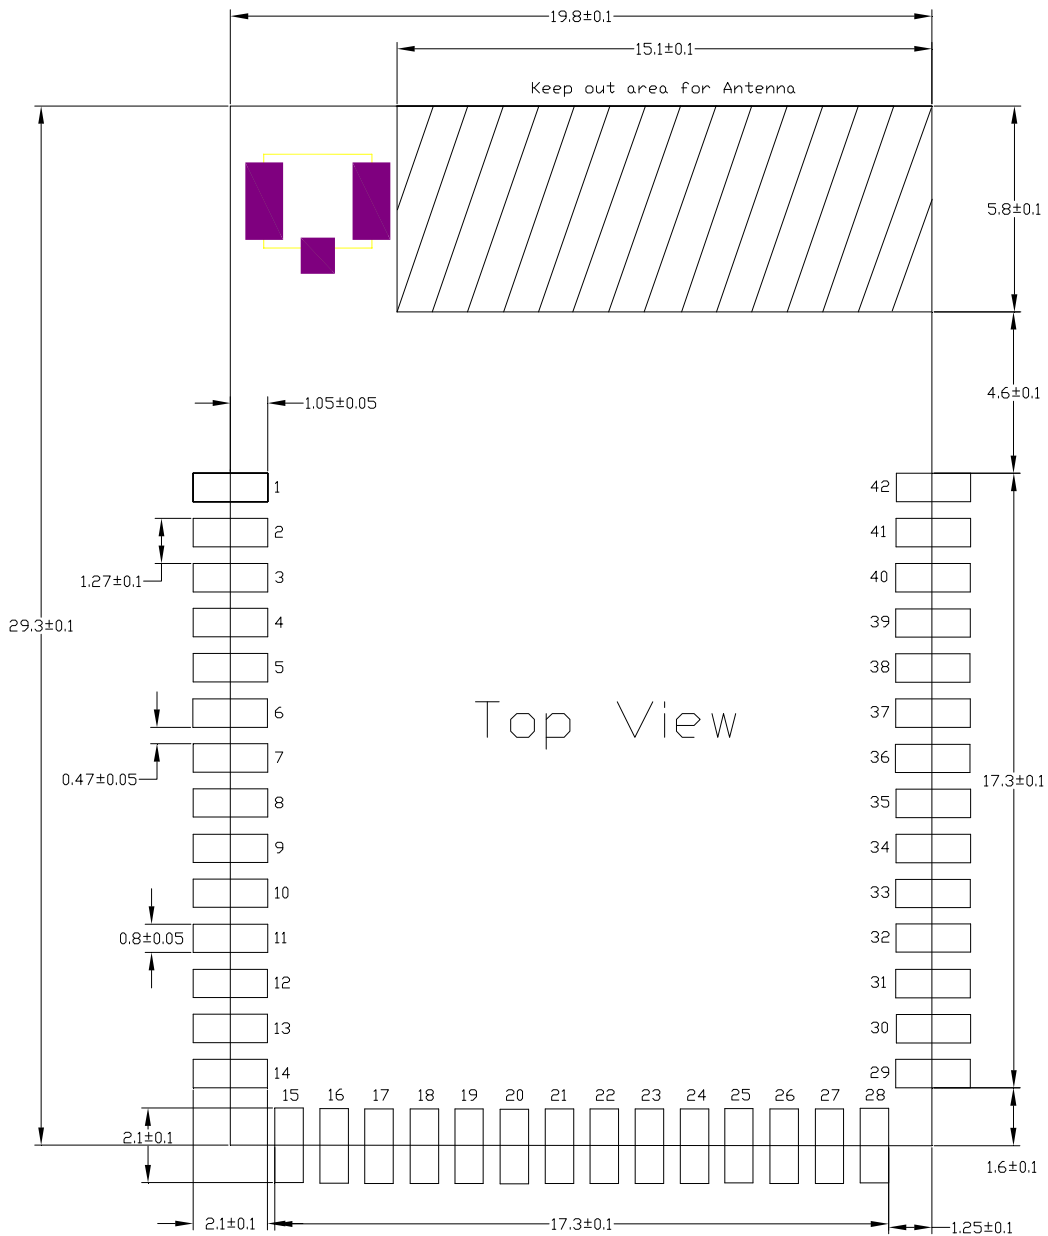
DFZM-TT2xx Module Recommended PCB Footprint (in mm)
